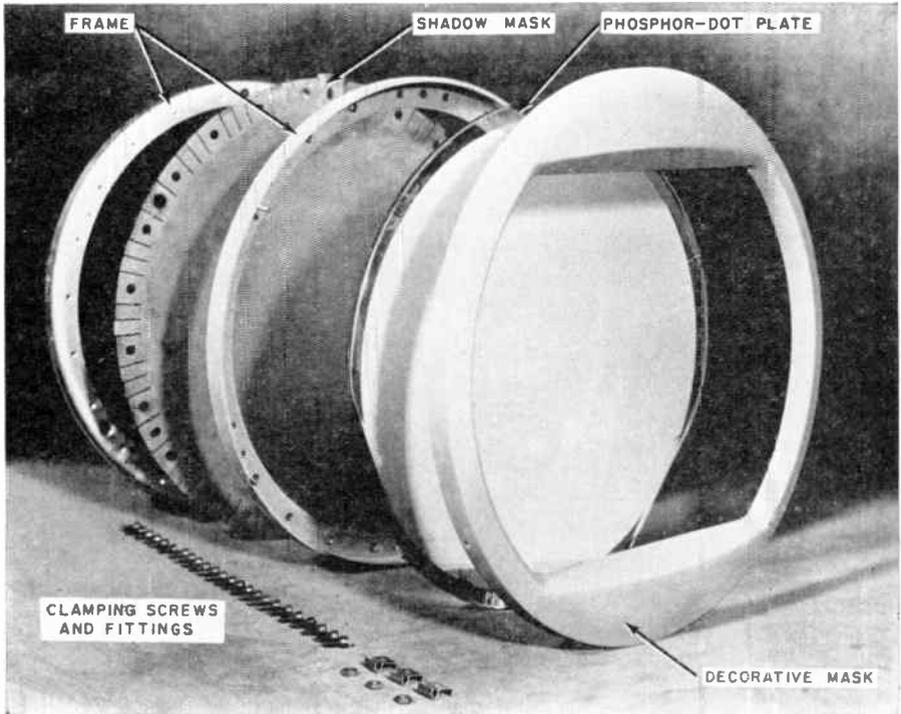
RCA Tricolor Tube Viewing Screen Assembly
